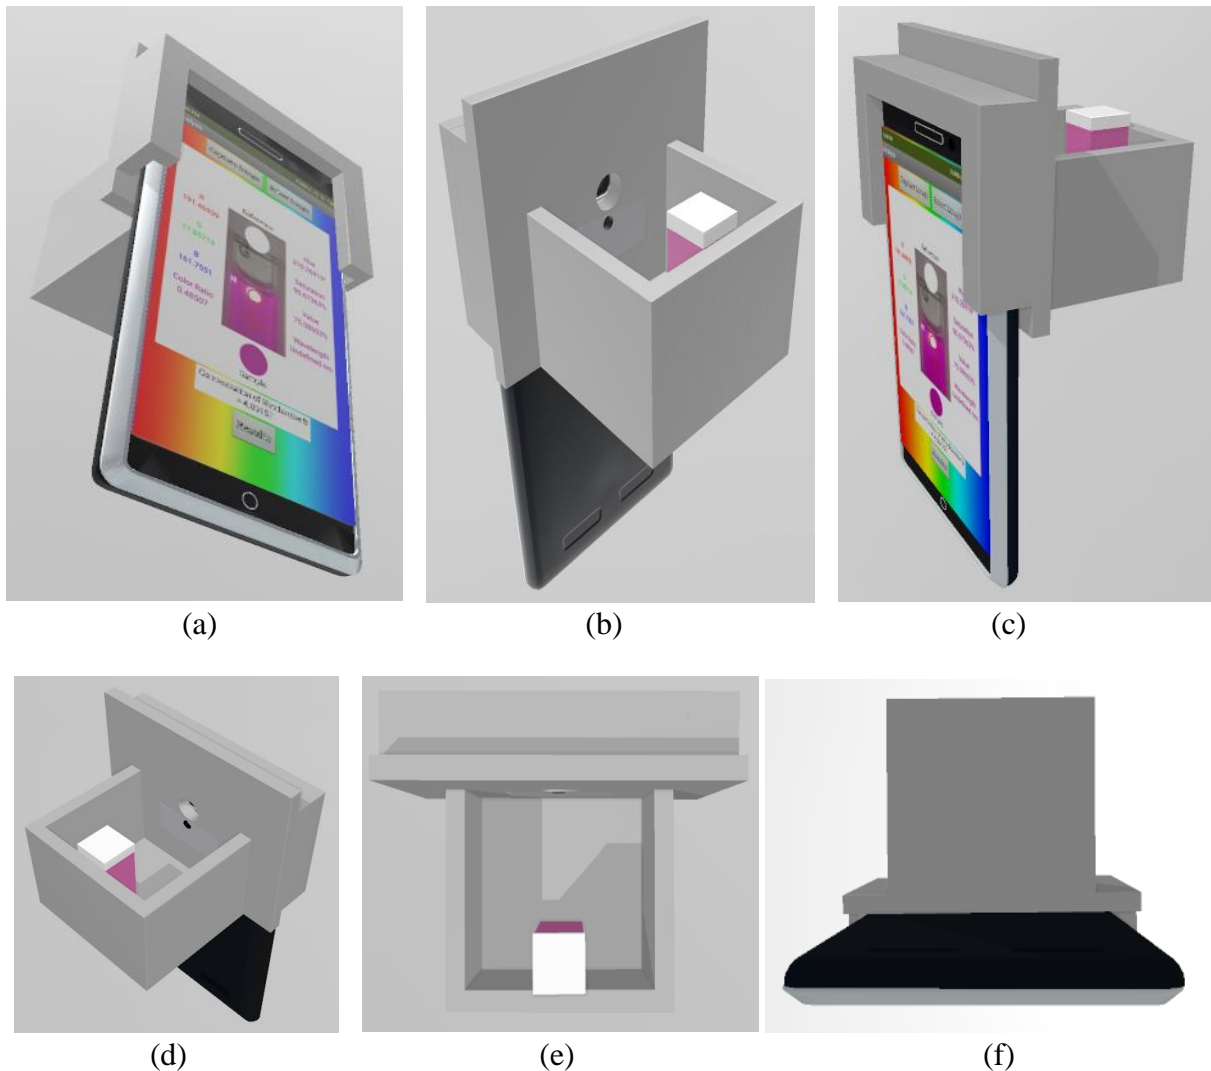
3D views of the designed optical enclosure attached with smartphone for colorimetric measurement (a) bottom left side corner view, (b) top right side corner view, (c) right side corner view, (d) top left side corner view, (e) top view and (f) bottom view.
